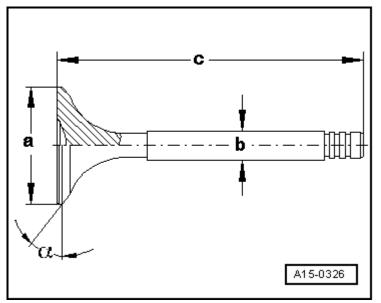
Identifying Valve Dimensions Courtesy of VOLKSWAGEN UNITED STATES, INC.
